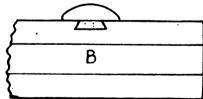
ADJUSTING GUN SIGHTS CORRECTLY
